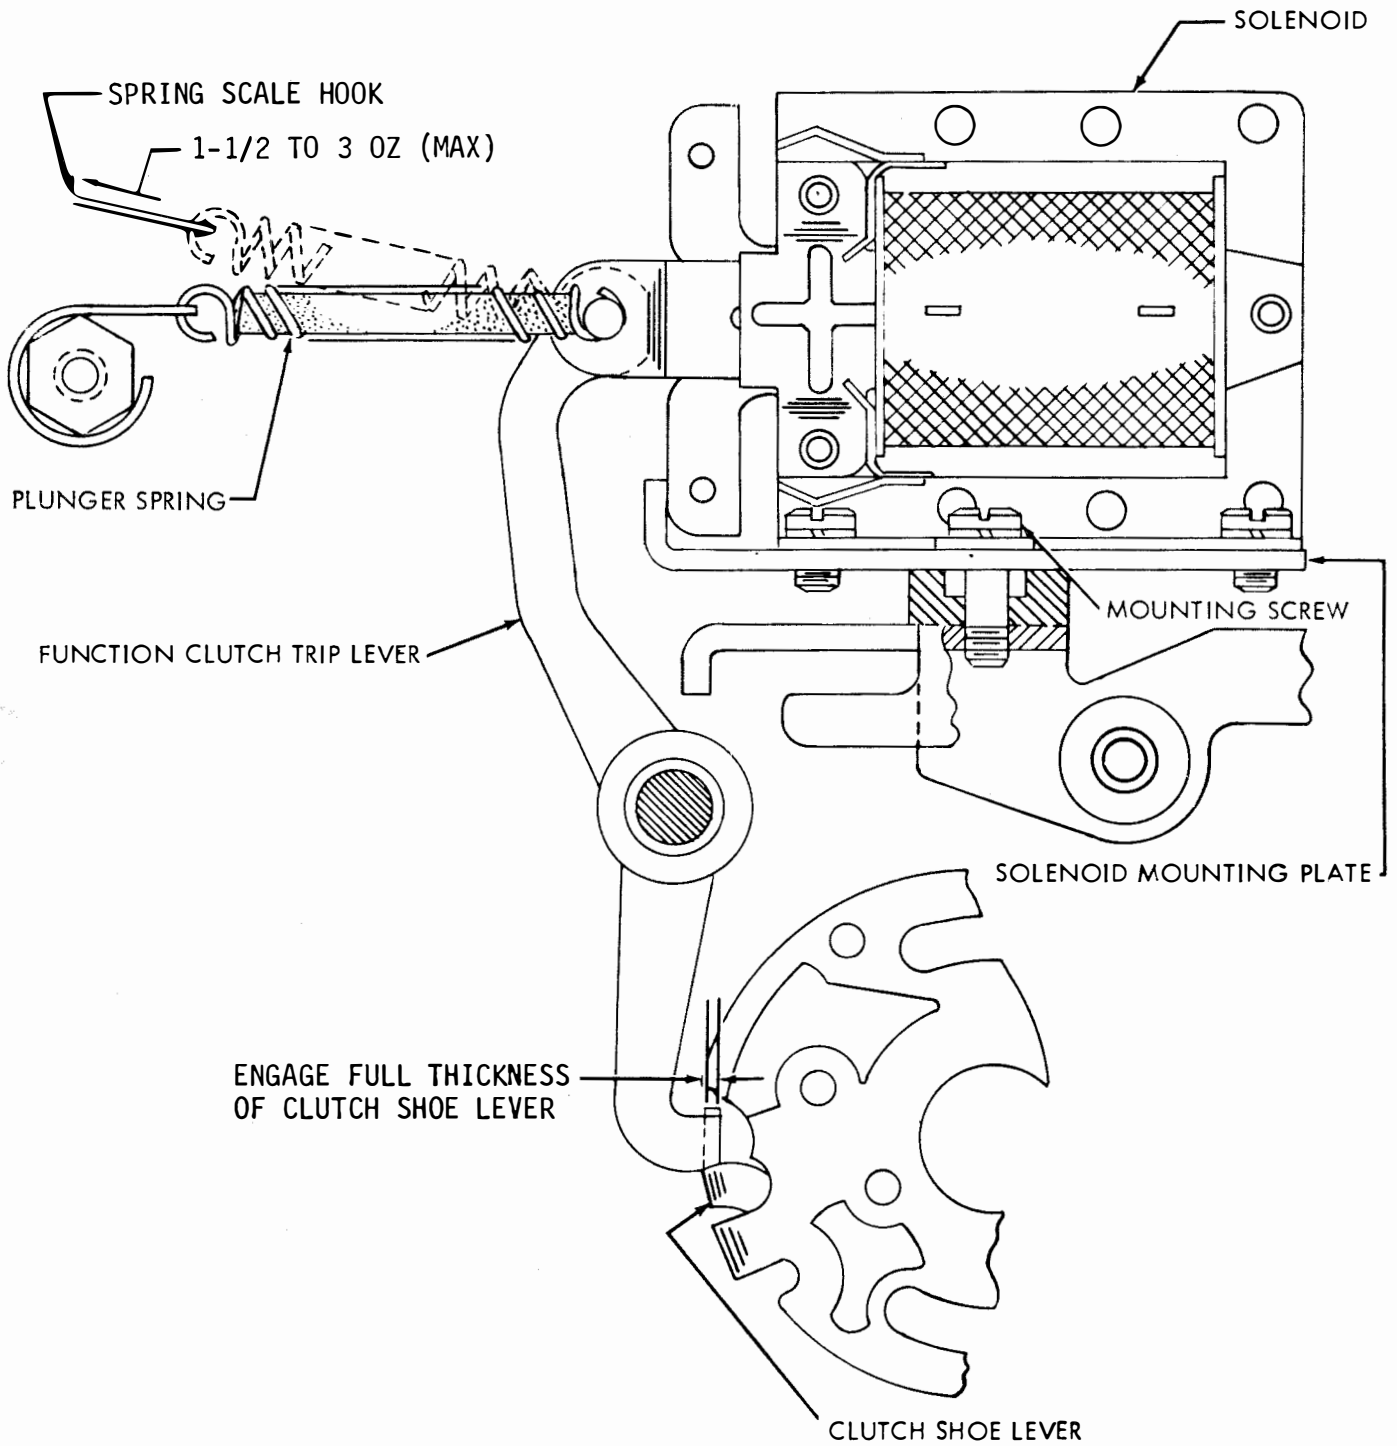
Function Clutch Trip Lever and Solenoid Plunger Spring, Left Side View
